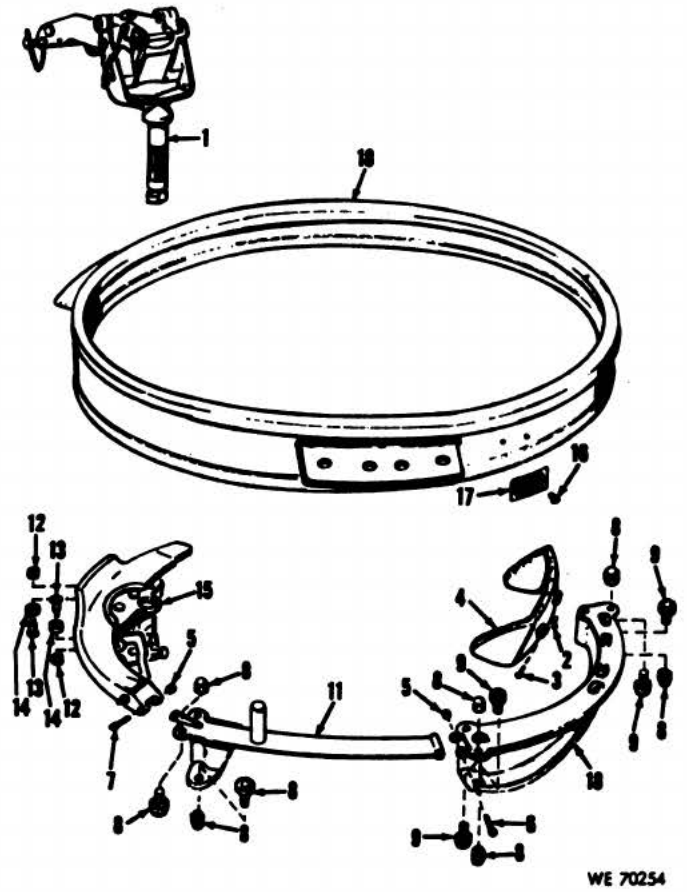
Mount, gun, ring, M19A1-7329017—partially exploded view.
